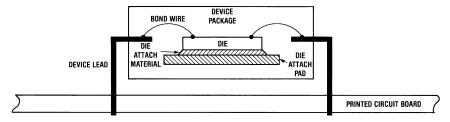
Integrated Circuit Soldered into a Printed Circuit Board (Cross-Sectional View)
